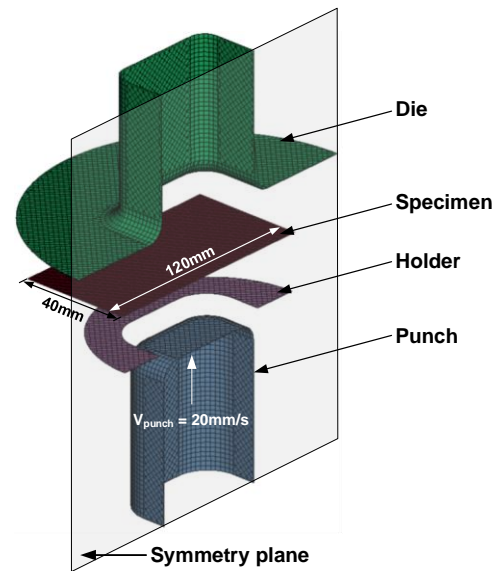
FE-model of TRB hot stamping rectangular drawing
